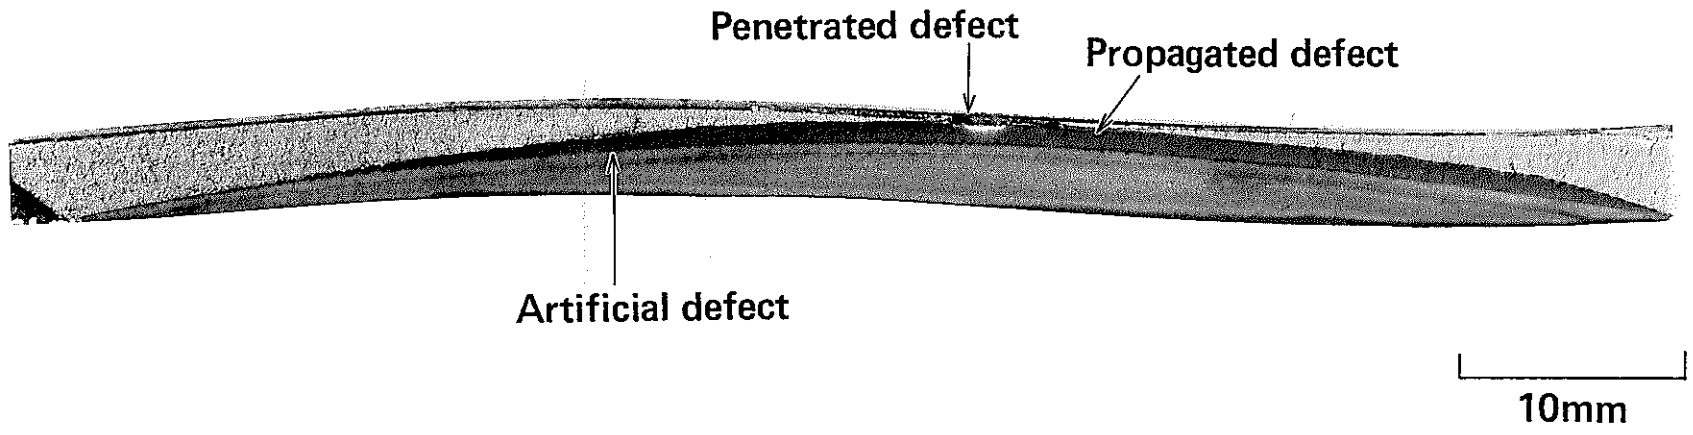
Fracture surface of large defect for DL-1 specimen
